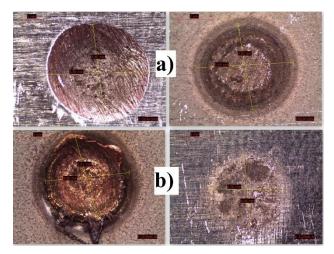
a) Spot weld when aluminum is in a contact with upper electrode; b) Spot weld when steel is in a contact with upper electrode
